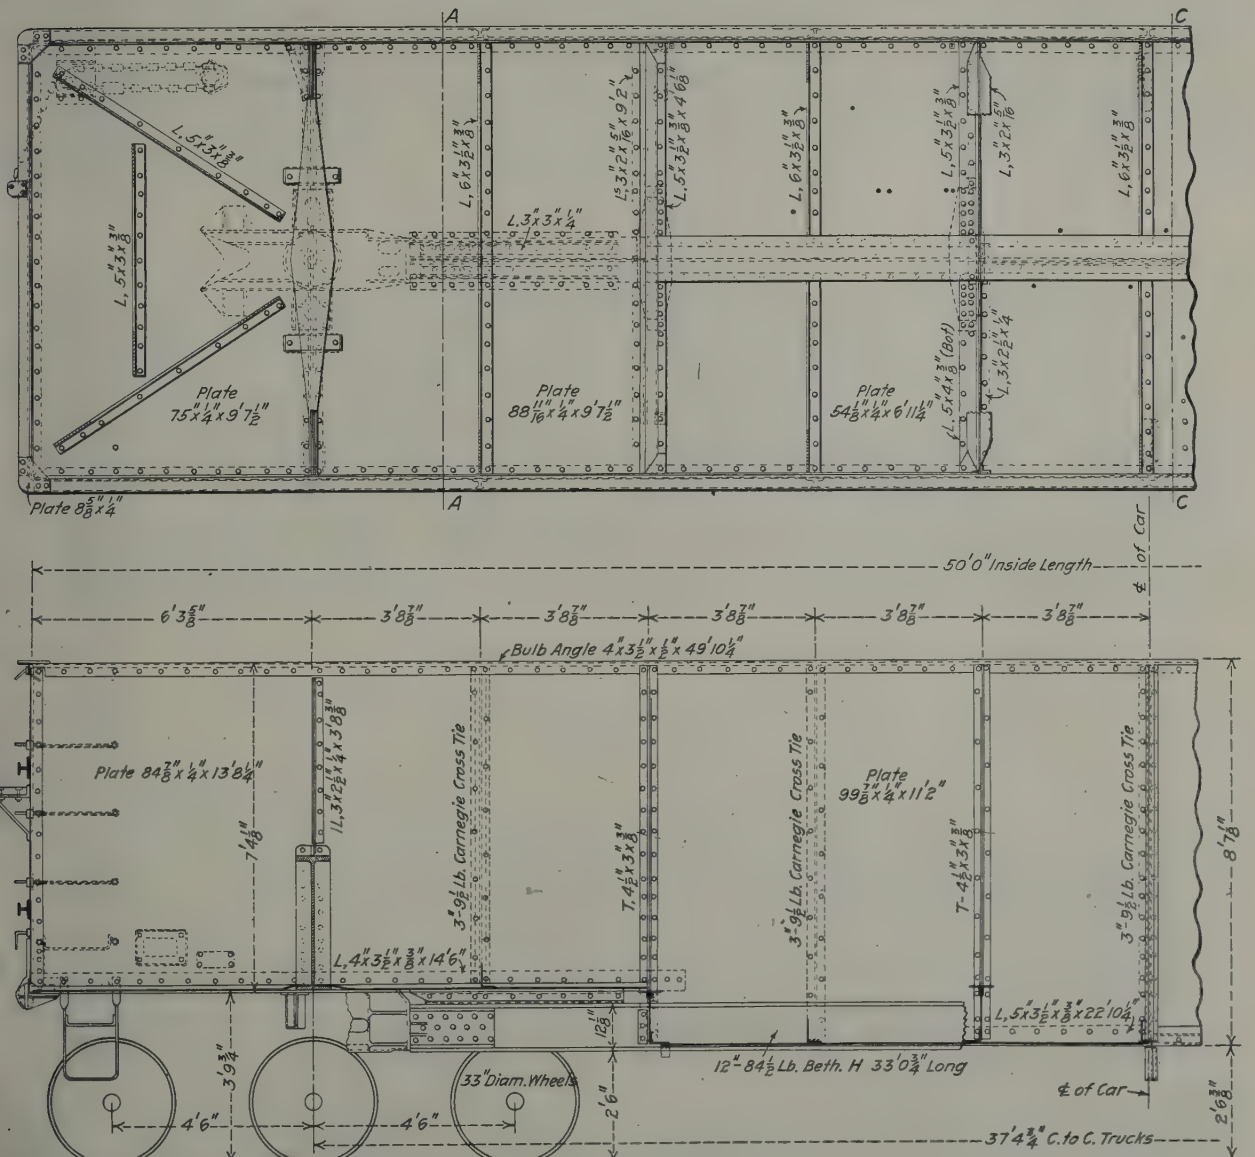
Plan and Elevation, 120-Ton Gondola Car Shown in Figs. 98-101.
